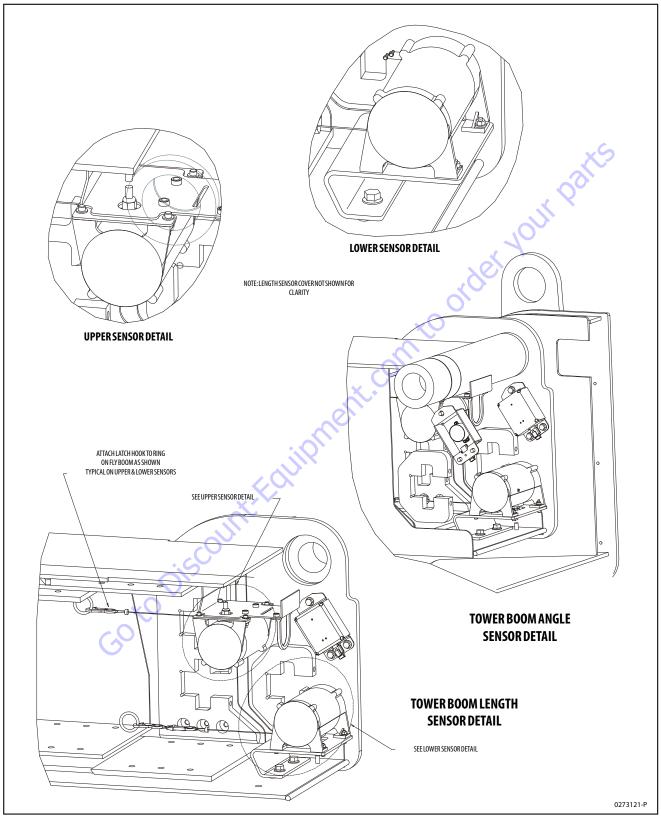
Boom Sensor Locations - Upper Length, Lower Length, & Tower Boom Angle - Sheet 1 of 2
